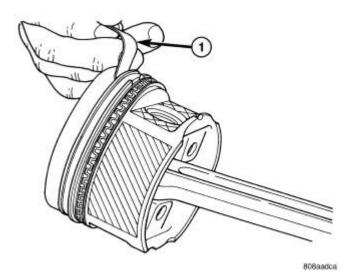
Piston Ring Side Clearance Courtesy of CHRYSLER LLC
